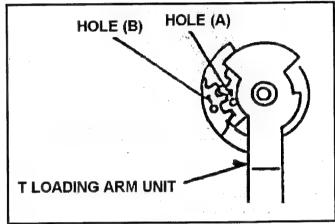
Phase Adjustment of T1 Loading Arm Unit
